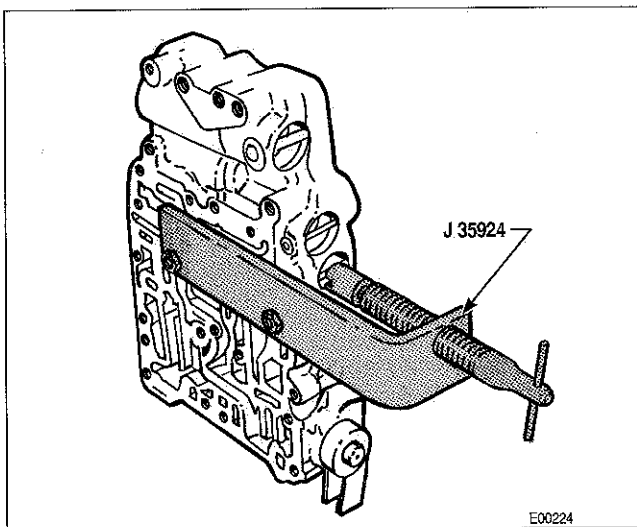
Use of Tool to Release Main-Pressure Valve Spring Force
